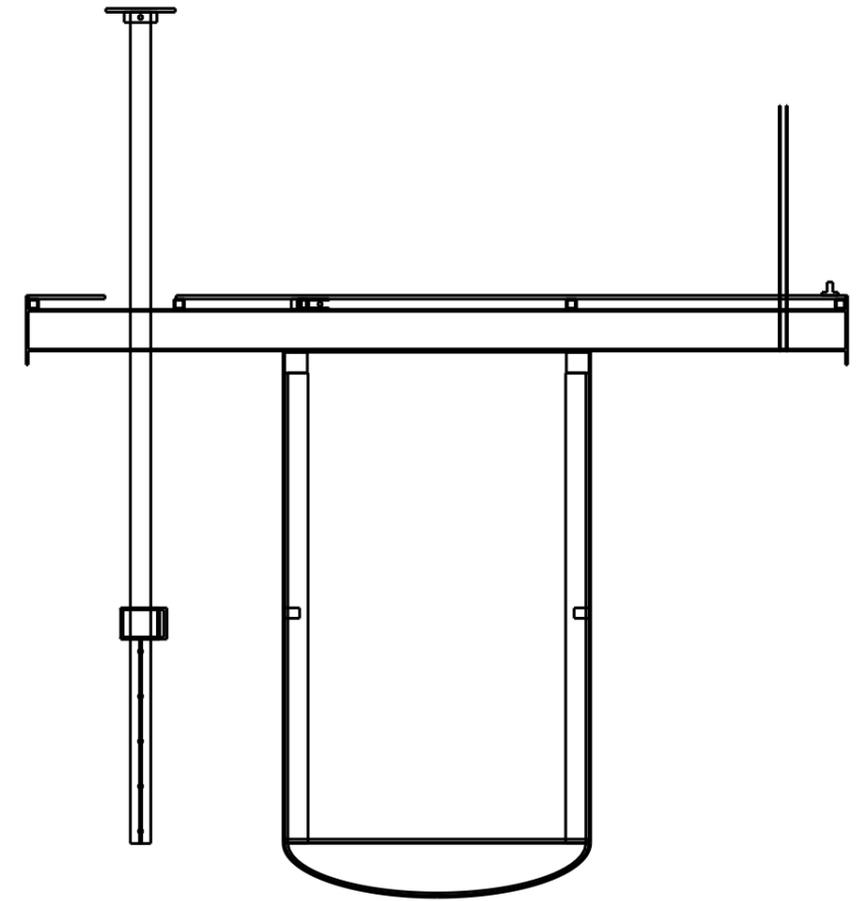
Body Plan—Section at rudder—raised (Y=3403mm)
